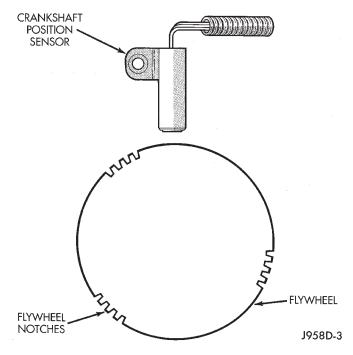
CKP Sensor Operation—4.0L 6-Cyl. Engine CRANKSHAFT POSITION SENSOR—4.7L ENGINE
